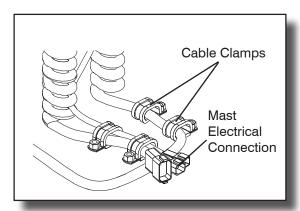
Cable Clamps and Mast Electrical Cables Installation
